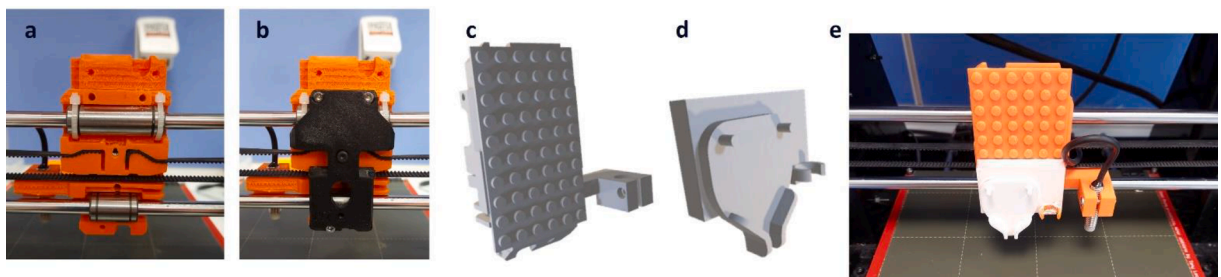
Construction and assembly of the X-carriage, platform holder and PINDA probe sensor: (a) X-carriage is attached to the smooth rods towards the bearing and the belt is inserted into the grooves. (b) Fixation of the X-carriage using M3 × 10 screws. (c) Render imaging of the X-carriage and (d) platform holder to house the nozzle. (e) Completed X-carriage and attached platform holder, equipped with PINDA probe sensor for Z-height calibration.
